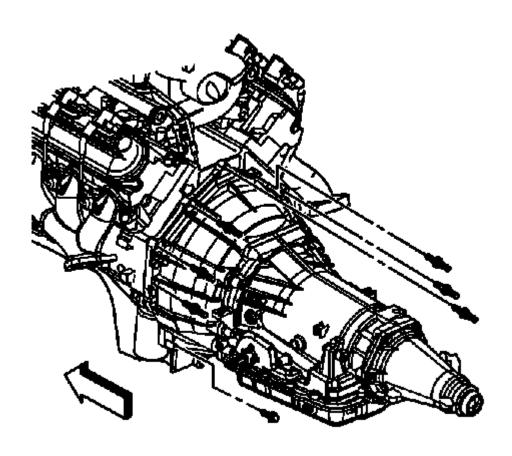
Identifying Six Studs & One Bolt Securing Transmission To Engine Courtesy of GENERAL MOTORS CORP.
